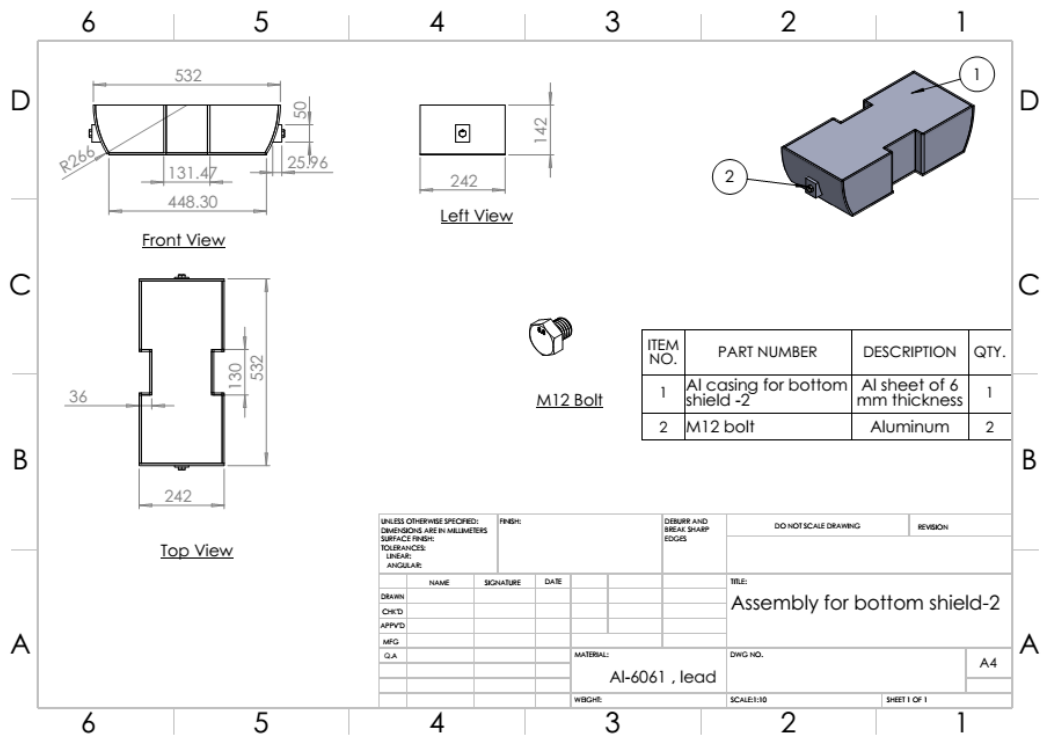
Design of Bottom Aluminum casing- 2. The casing is made of Al-6061 alloy and the inside will be filled with lead.
